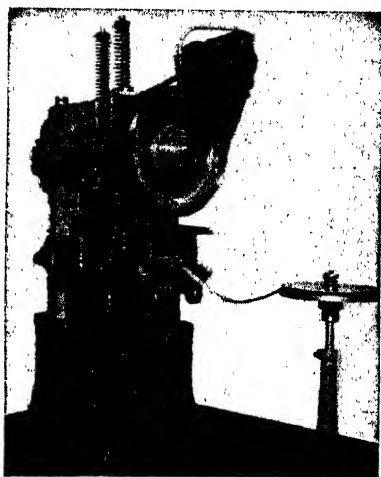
“High-production” press and die used to complete about 500 clip springs (250 strokes) per minute; see Fig. 315.
